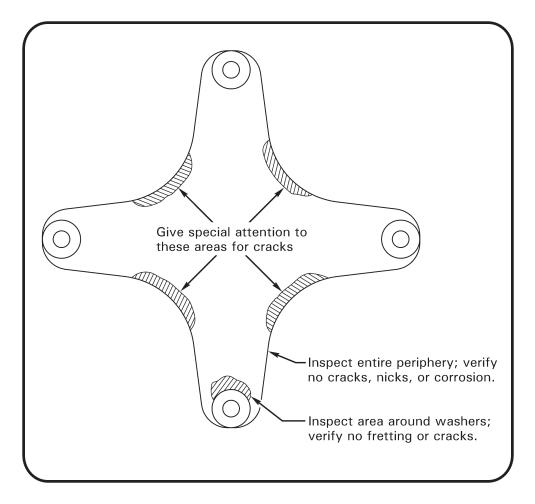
B A947-1 FLEX PLATE INSPECTION
